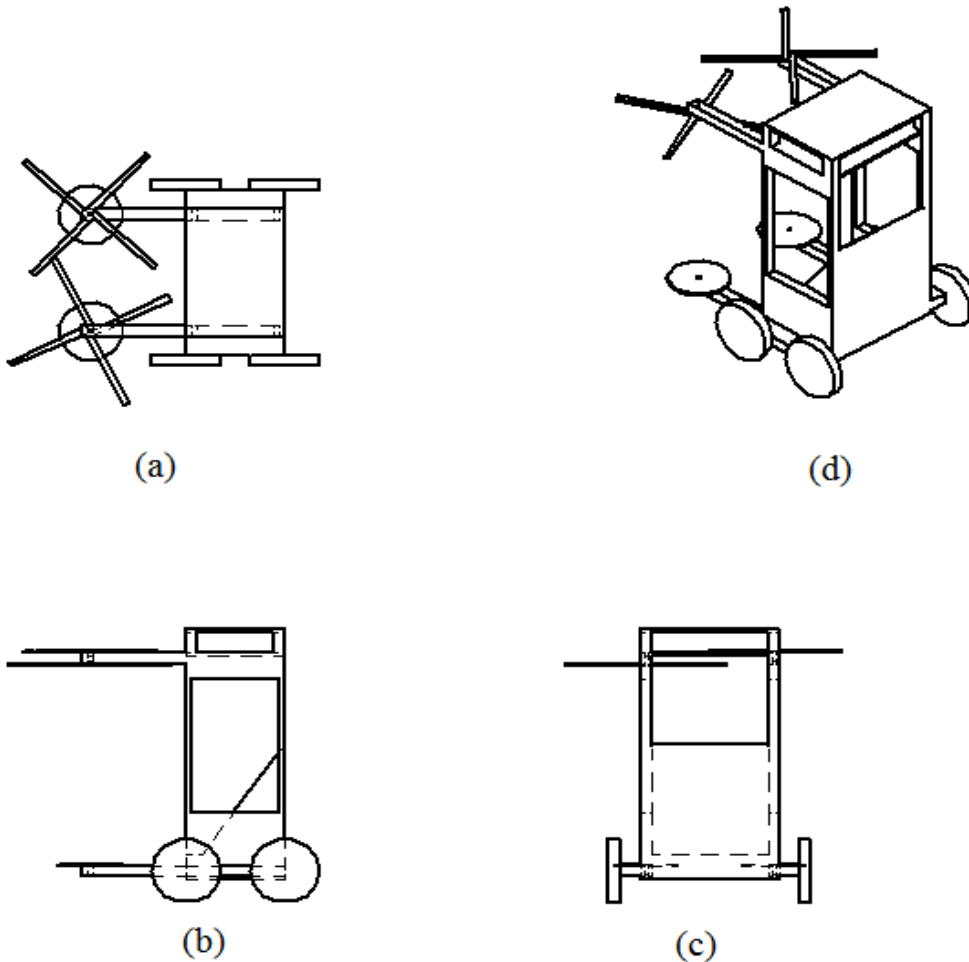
Orthographical views of concept robot (a) top view (b) right side view (c) front side view (d) complete view
